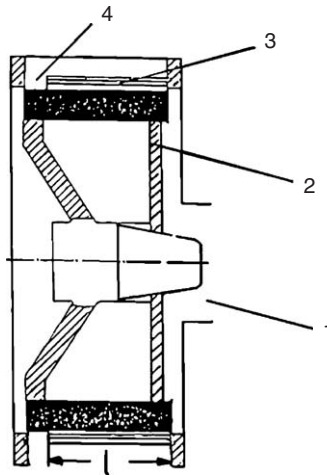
Section through a rotor impact mill with closed rotor: 1, milling material inlet; 2, closed rotor; 3, grinding track; 4, outlet gap.
